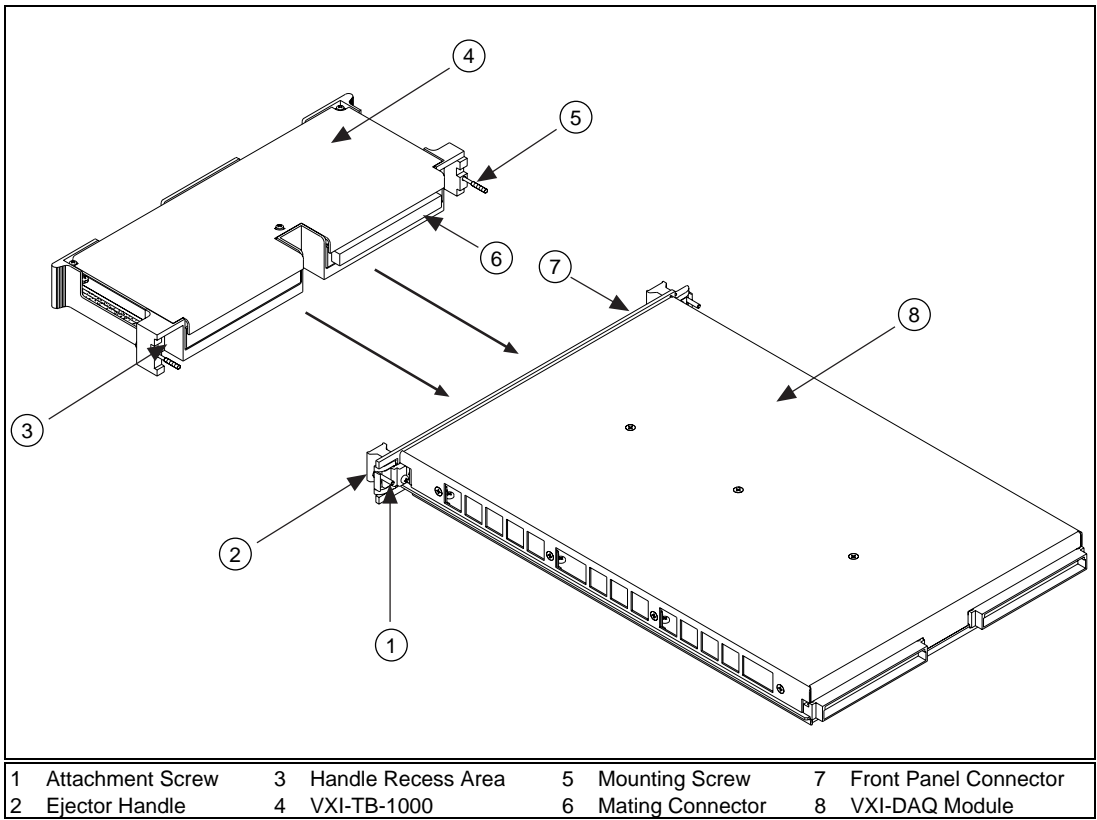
Installing the Terminal Block on the VXI-DAQ Module
